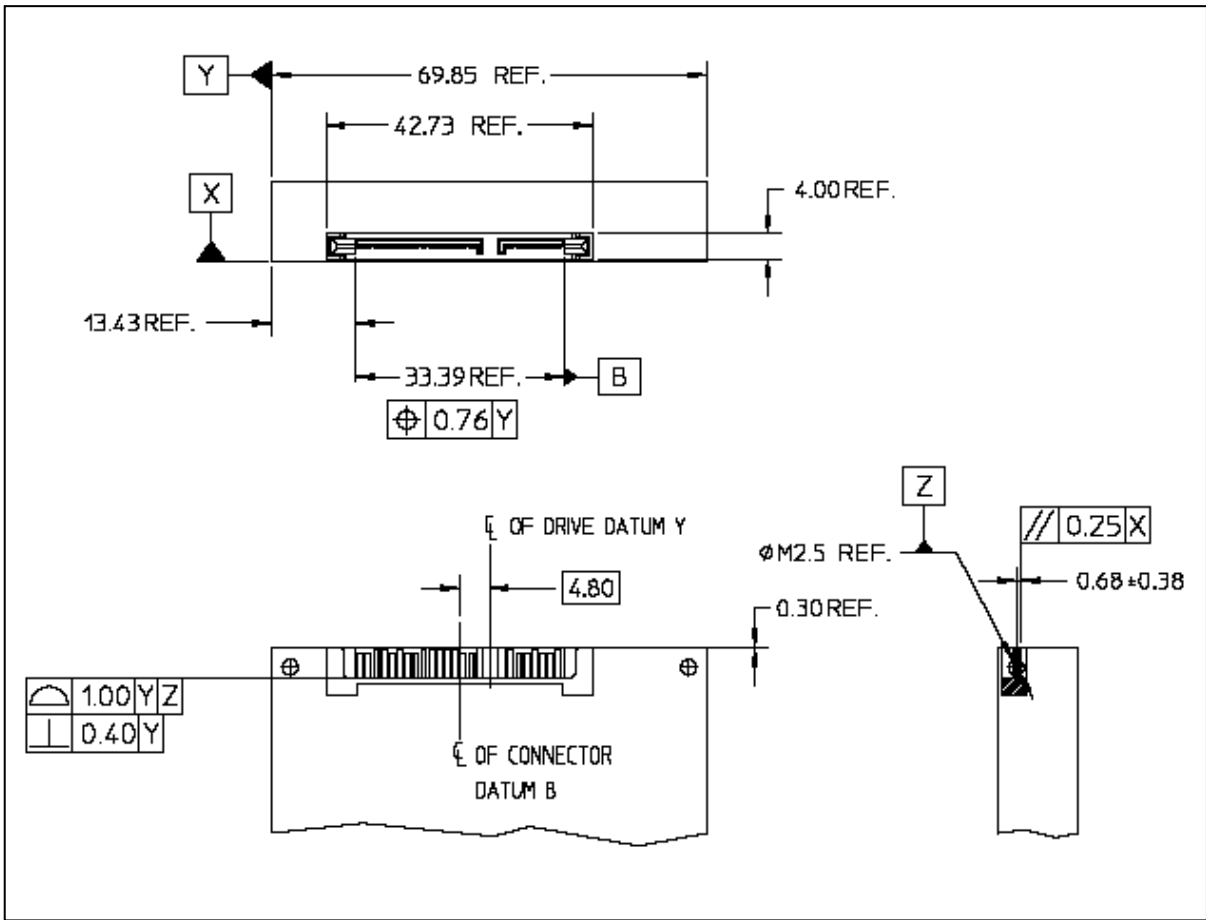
Device Plug Connector Location on 1.8" Side Mounted Device
